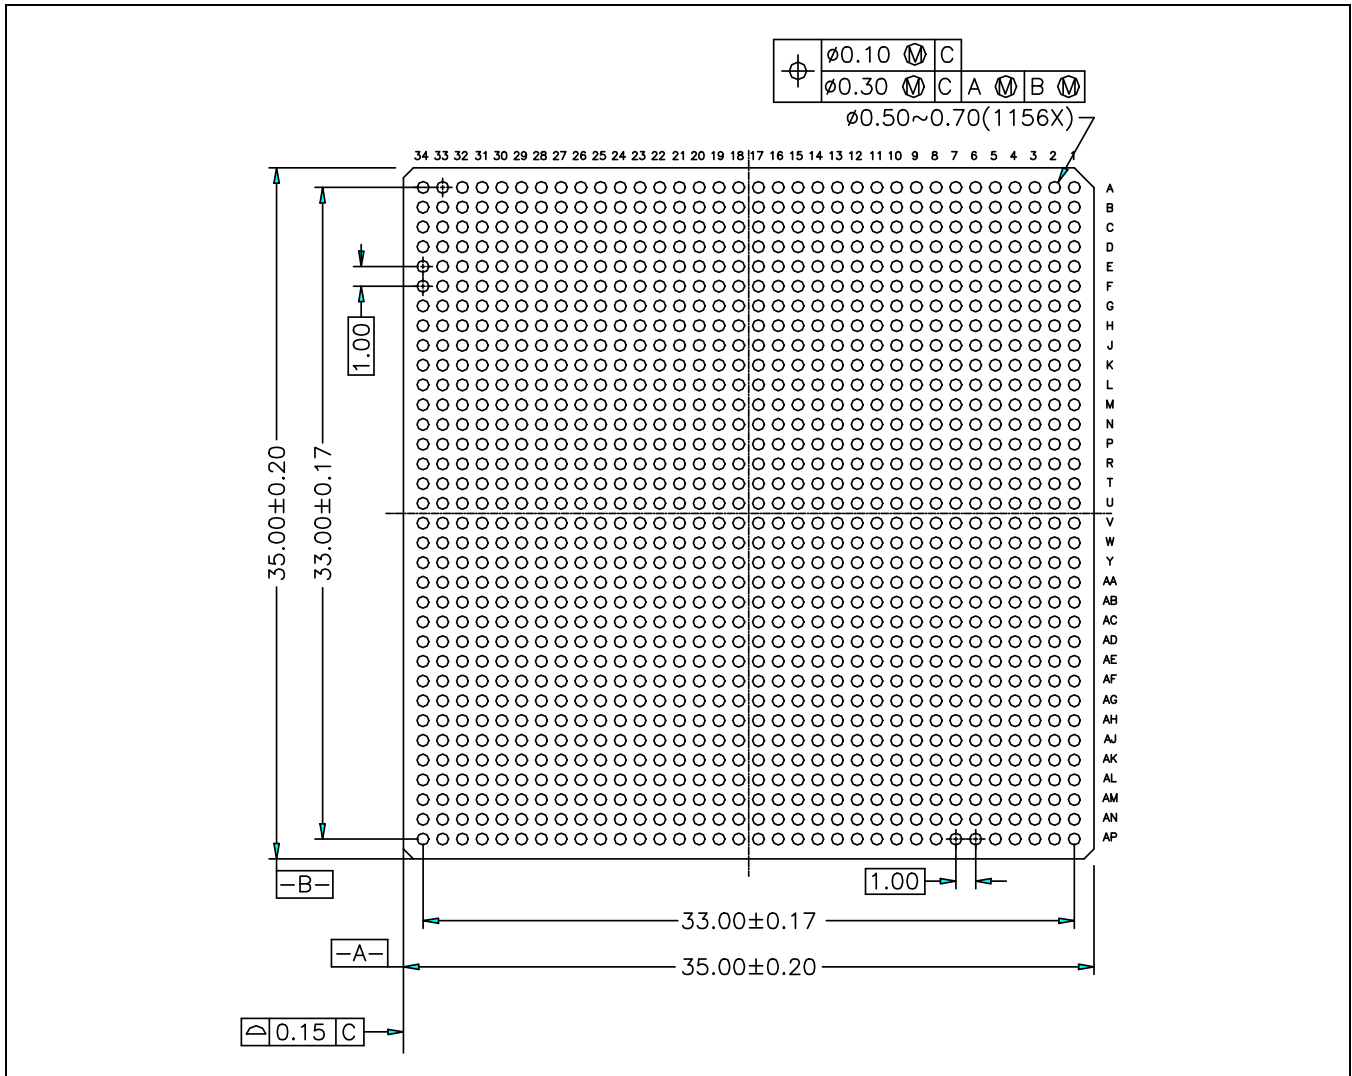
M21131/M21151 (-12-13/-14) Bottom View of Package (in mm)
